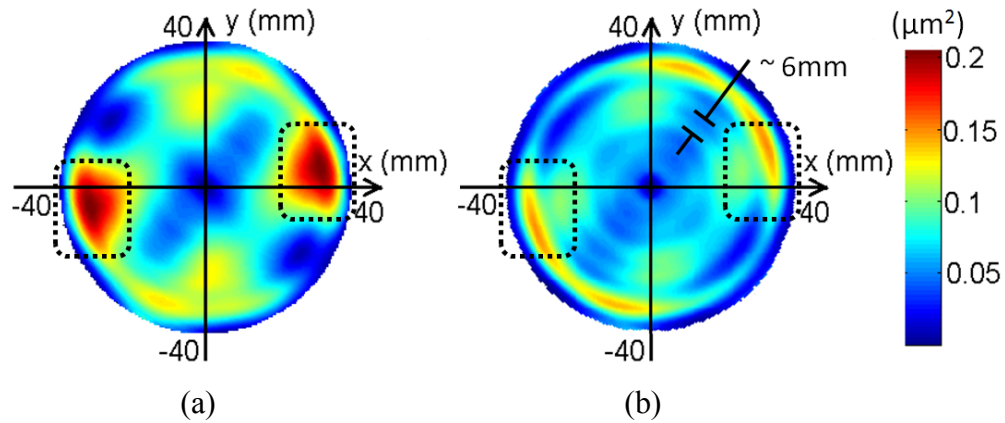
Area SF in four quadrants. (a) Initial machining. (b) Compensation machining.
